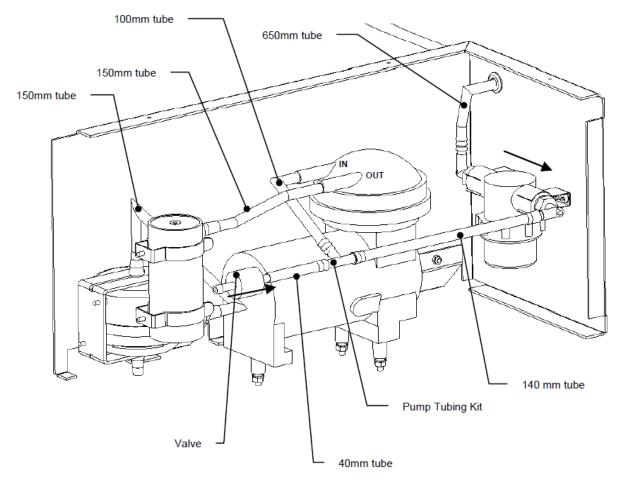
Tubing Connections in the Lower Fluidics Assembly
